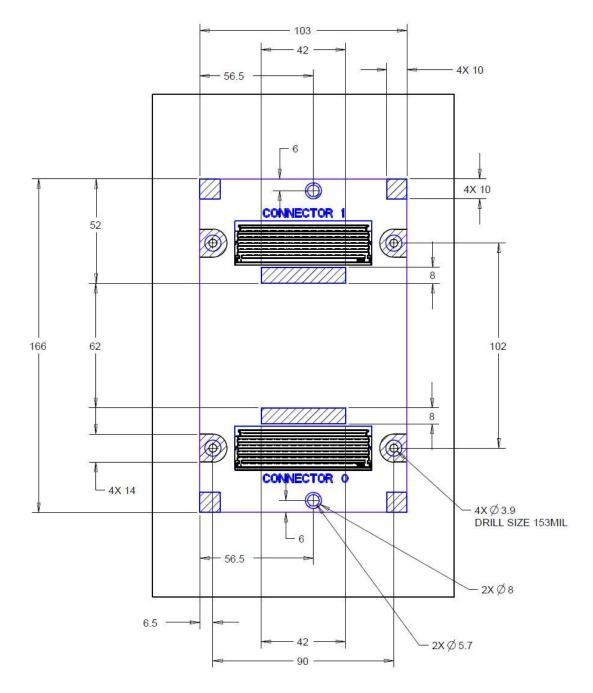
Baseboard KOZ and Grounding Pad Dimensions
